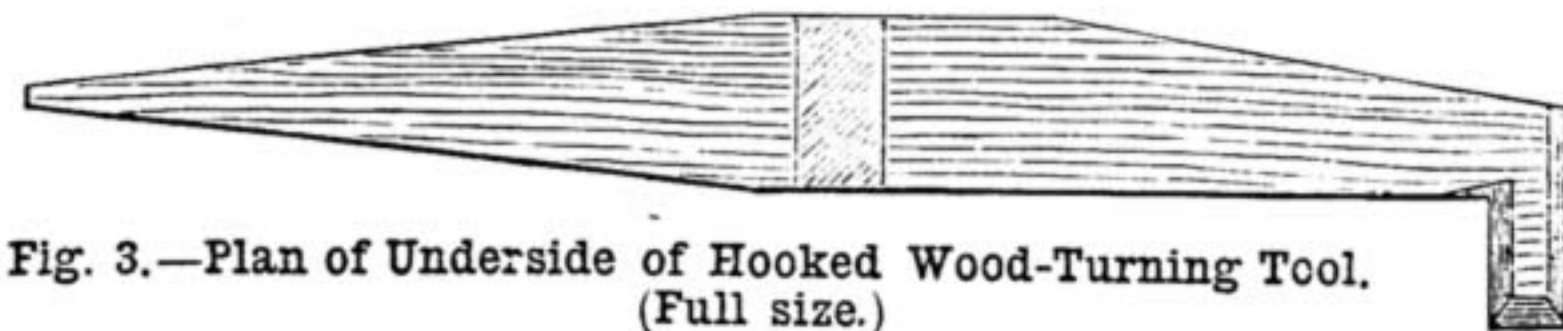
Plan of Underside of Hooked Wood-Turning Tool. (Full size.)
